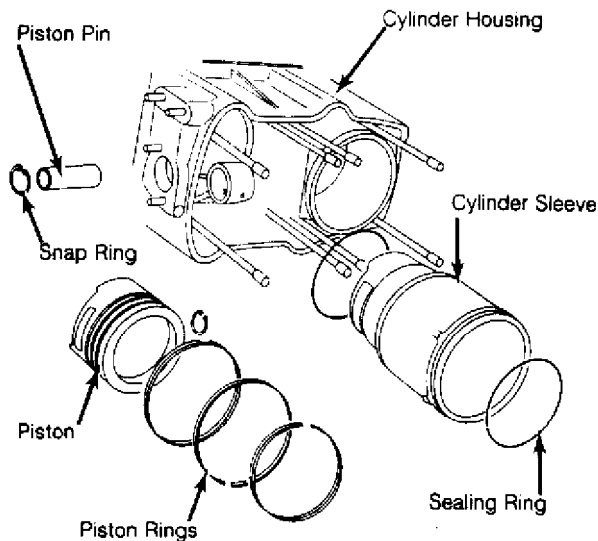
Installing Cylinder/Piston into Cylinder Housing
